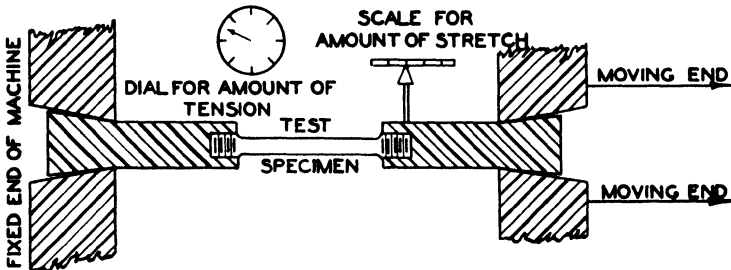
Diagrammatic sketch of a test specimen in a testing machine.
